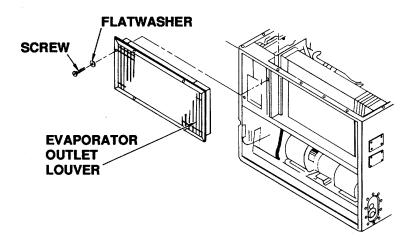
Evaporator Outlet Louver Removal/Replacement
